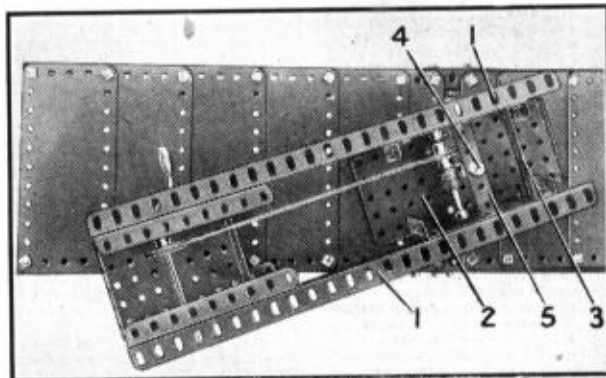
An underneath view of the bridge pier showing the swivelling mechanism.
